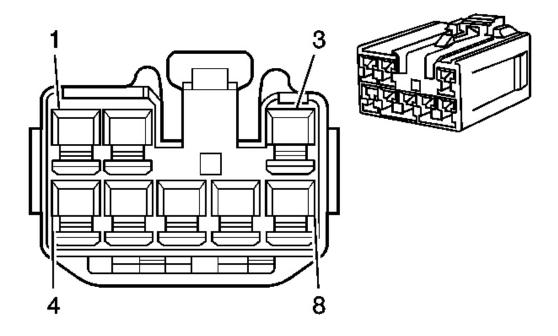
Driver Door Lock and Window Switch C1 Connector End View Courtesy of GENERAL MOTORS CORP.
